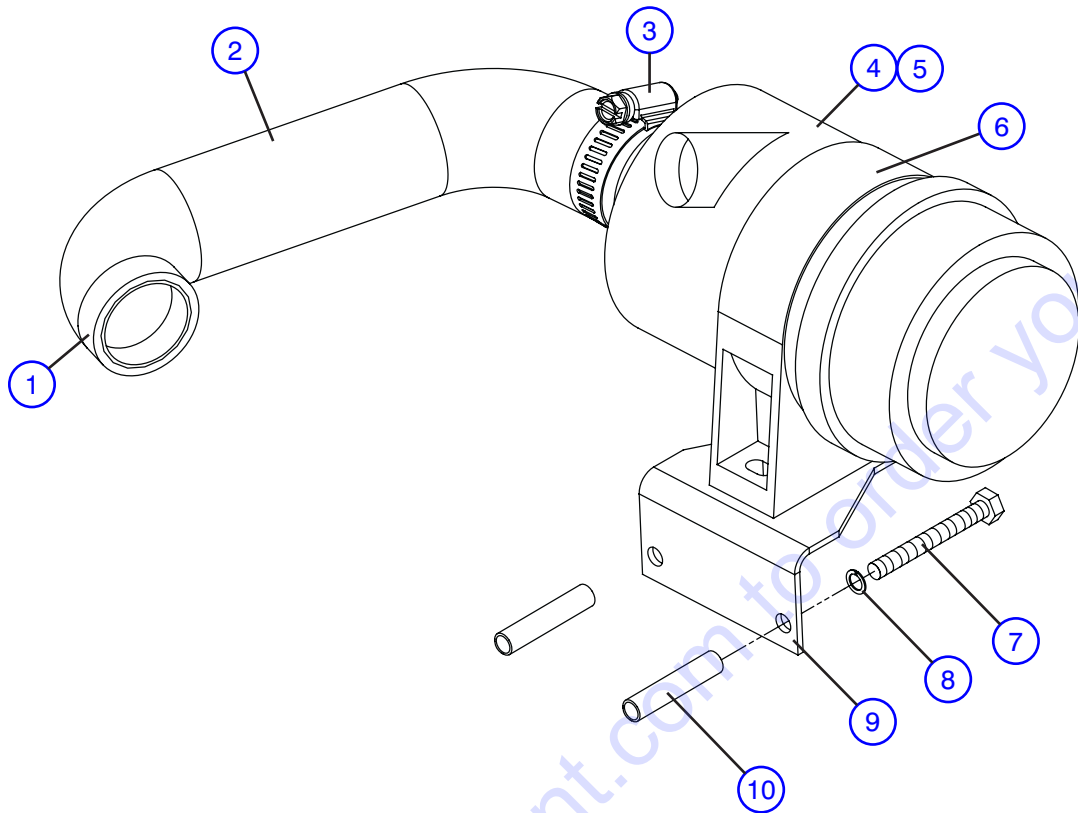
Engine Assembly (Kubota Engine DF972) (Continued)
